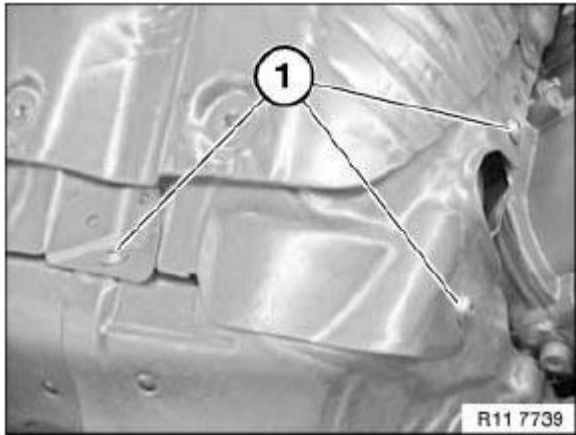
Identifying Top Heat Shield Screws (2 Of 2)
